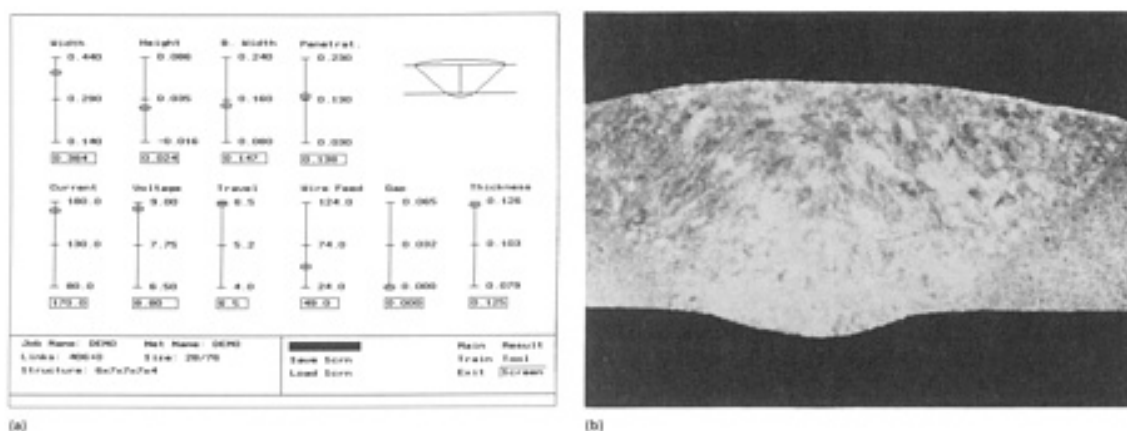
NEURAL NETWORK SYSTEM FOR AUTOMATED WELDING. (A) USER INTERFACE OF WELDBEAD NEURAL NETWORK WELD MODEL FOR A GTAW WELD IN THIN-SECTION STAINLESS STEEL. (B) MACROGRAPH OF THE RESULTING TEST WELD CORRESPONDING TO THE PREDICTION BY THE WELDBEAD NEURAL NETWORK, SHOWN IN (A)
